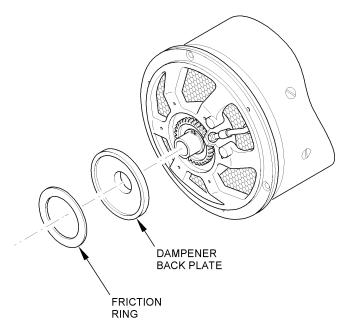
Installing Dampener BackPlate and Friction Ring
